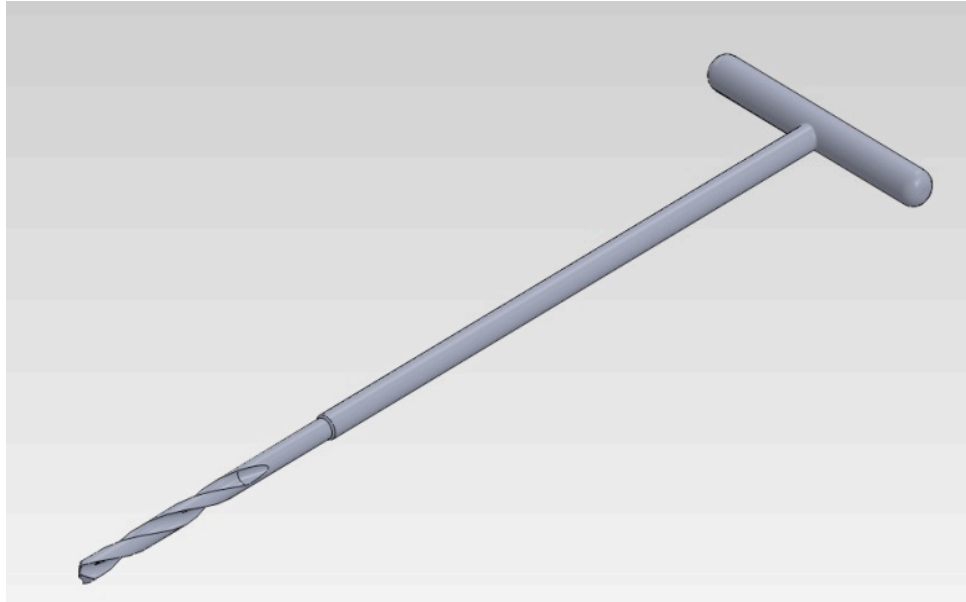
CAD Drawing of 9mm Drill (Solidworks 2011)
